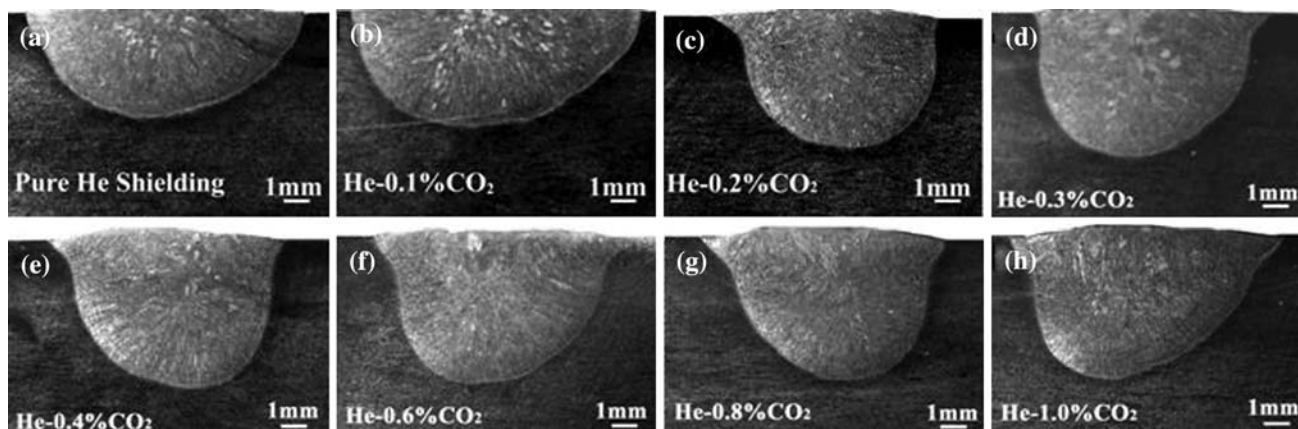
Weld shapes under different He–CO₂ shielding with 3 mm arc length
